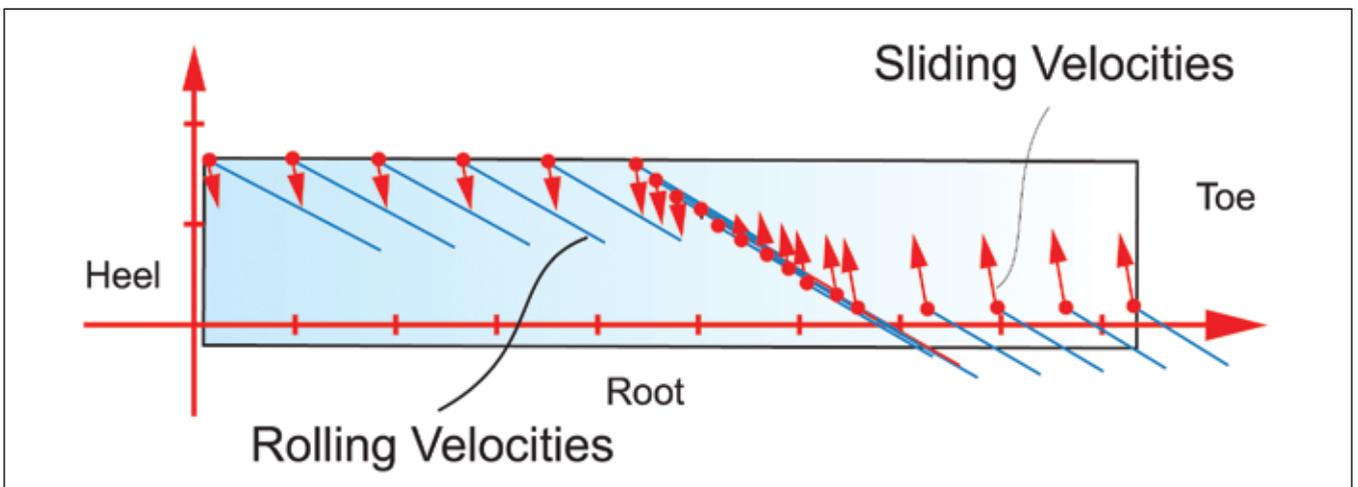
Rolling- and sliding-velocities of a spiral bevel gear set in path-of-contact points.
